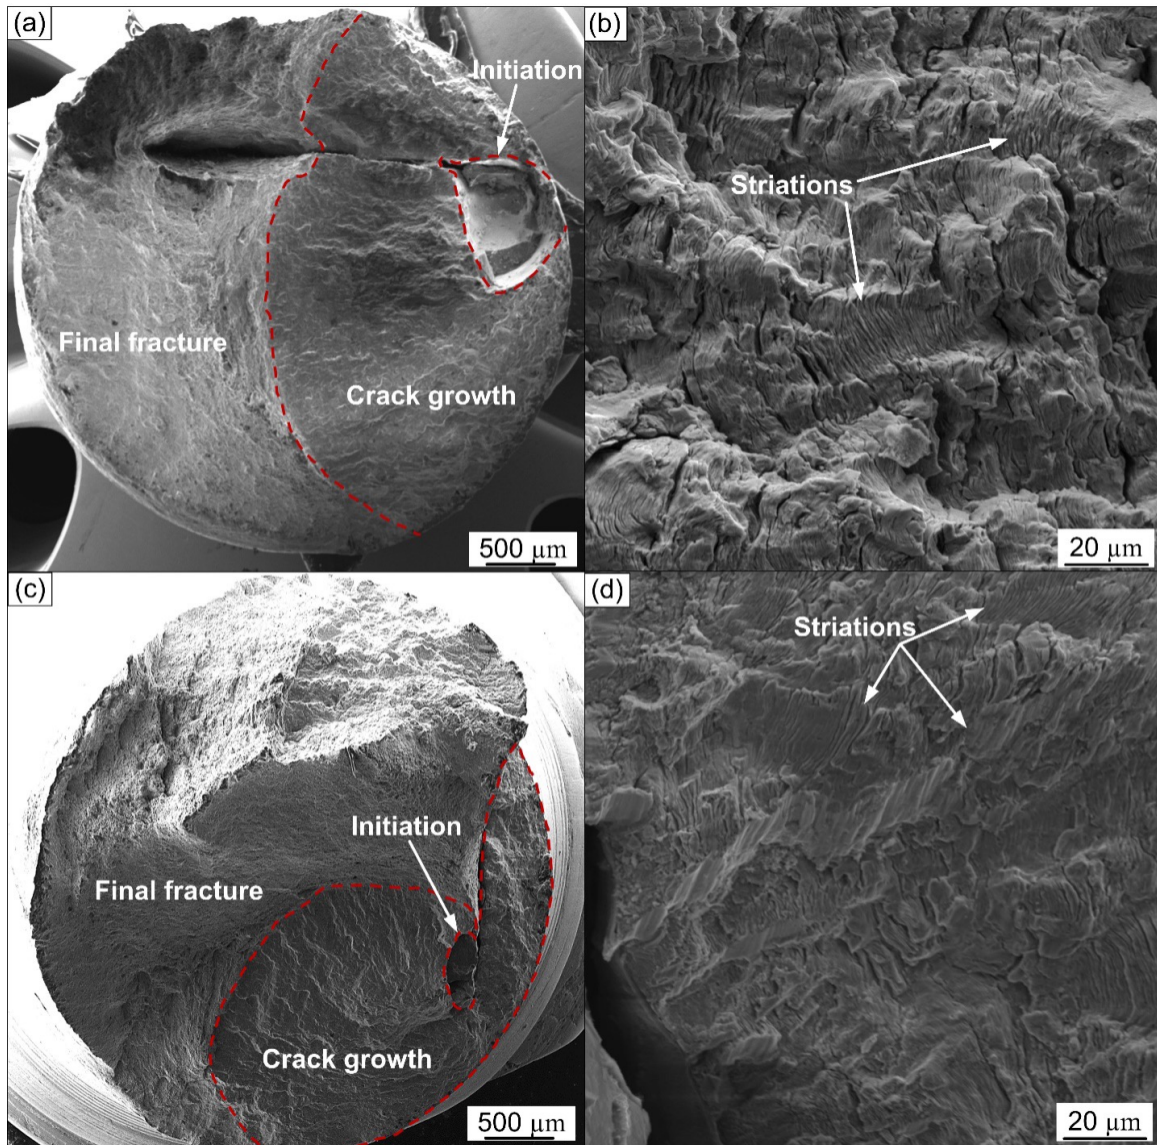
Fractography of specimens with defects: (a) the entire fracture surface Specimen A (b) fatigue striations in Specimen A, (c) the entire fracture surface Specimen B, and (d) fatigue striations in Specimen B
